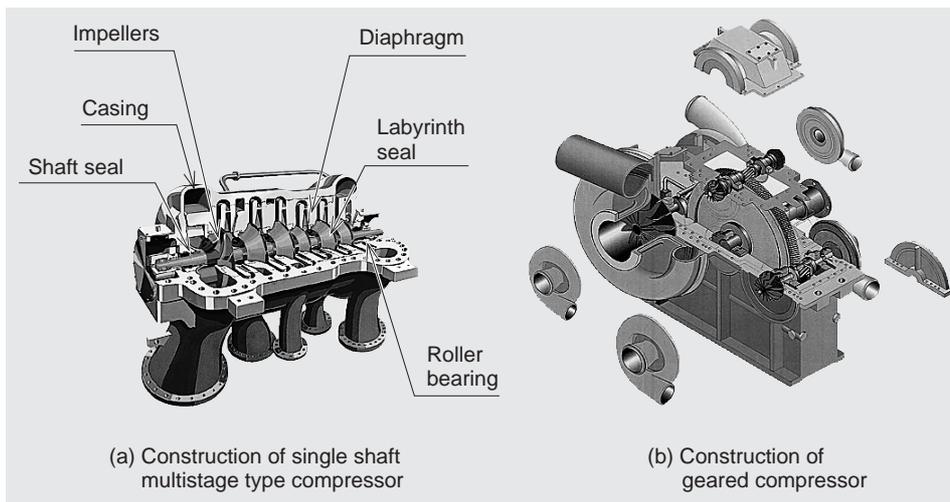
Comparison of single shaft multistage compressor and geared compressor (Integrally geared type compressor)
